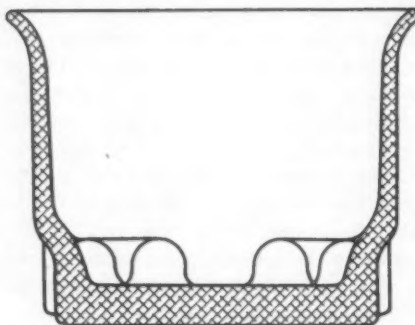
Cross-section of a hot pressed magnesium part of varying thickness. Like a die casting which it resembles it requires no machining operation.
